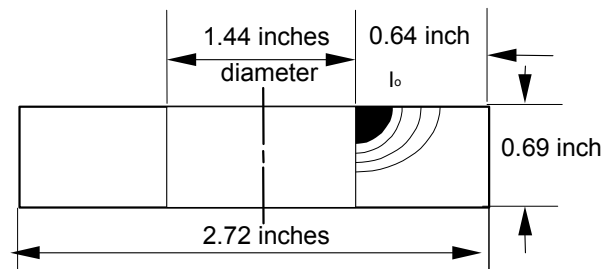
MAIN ROTOR SPINDLE SECTION A-A
